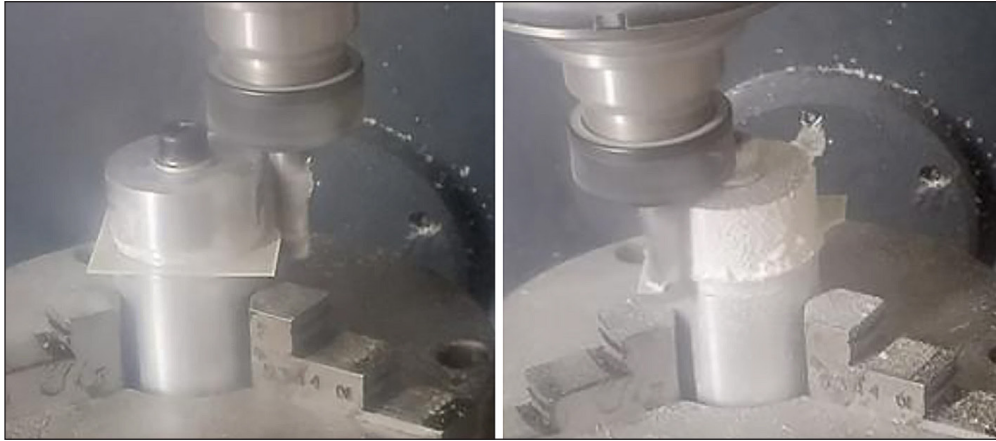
Machining along the tangent arc of the tool path in material aligned with the machining direction
